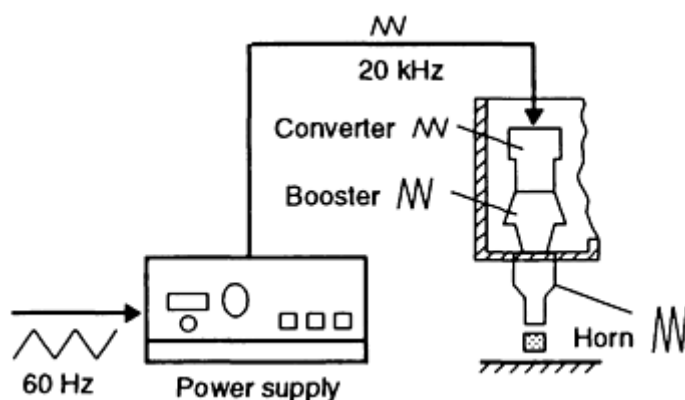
SCHEMATIC OF ULTRASONIC-WELDING COMPONENTS
